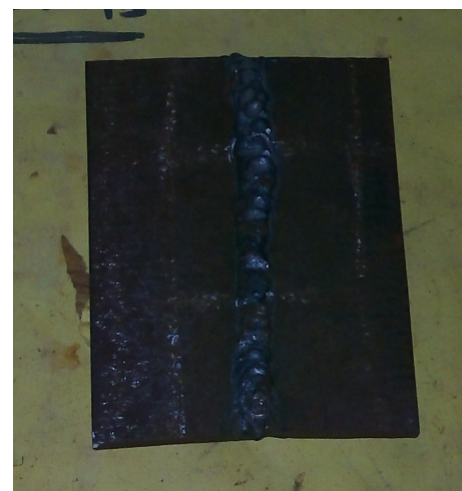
Welded Sample of Low Carbon Steel ASTM A29
